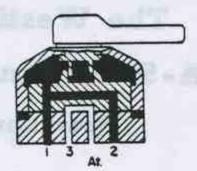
A-5-A and A-5-B Rotair Valve Assemblies
